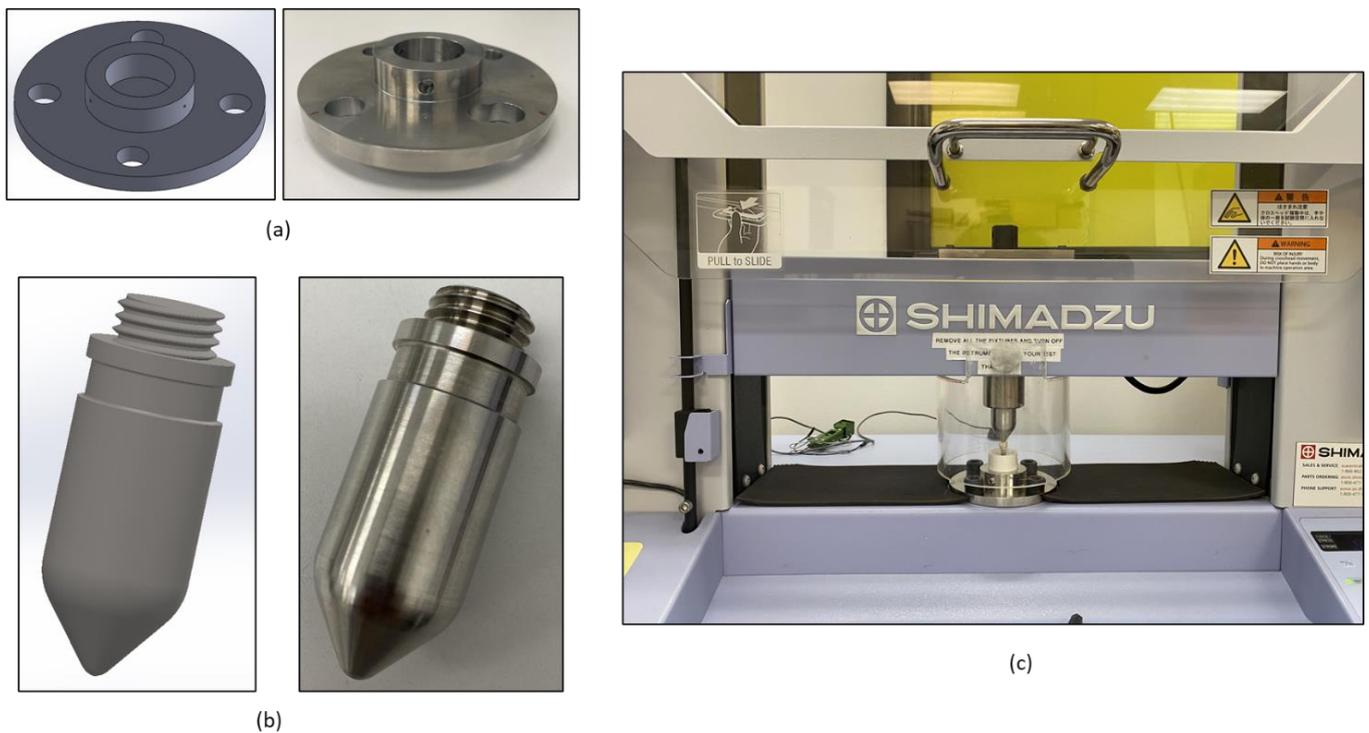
(a) Custom Shimadzu fixture (left: CAD model; right: milled part). (b) Custom metal piston (left: CAD model; right: milled part). (c) Compressive load test setup.
